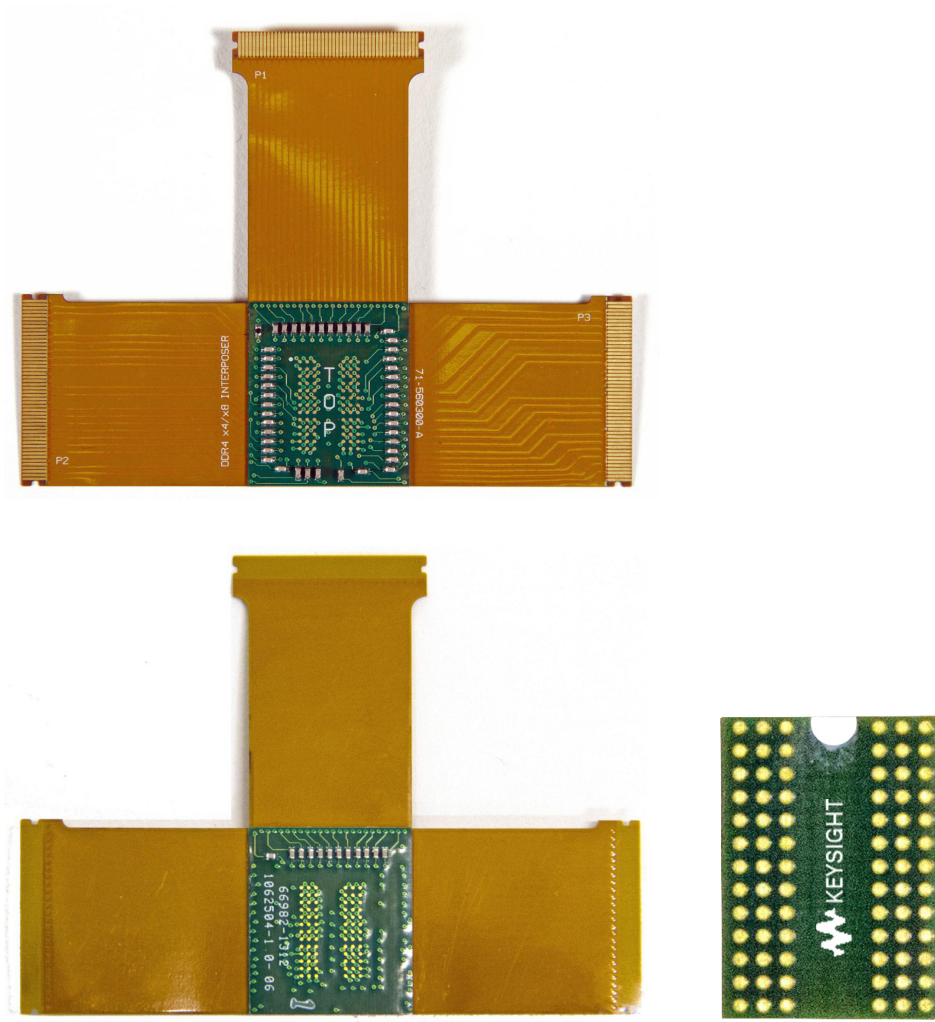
W4633A top and bottom views and DDR4 x4/x8, 78-ball riser.
